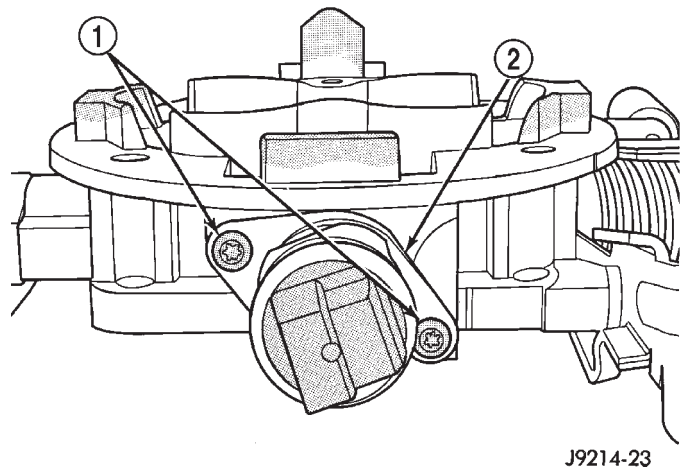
Mounting Bolts (Screws)—IAC Motor—3.9/5.2/5.9L Engines
